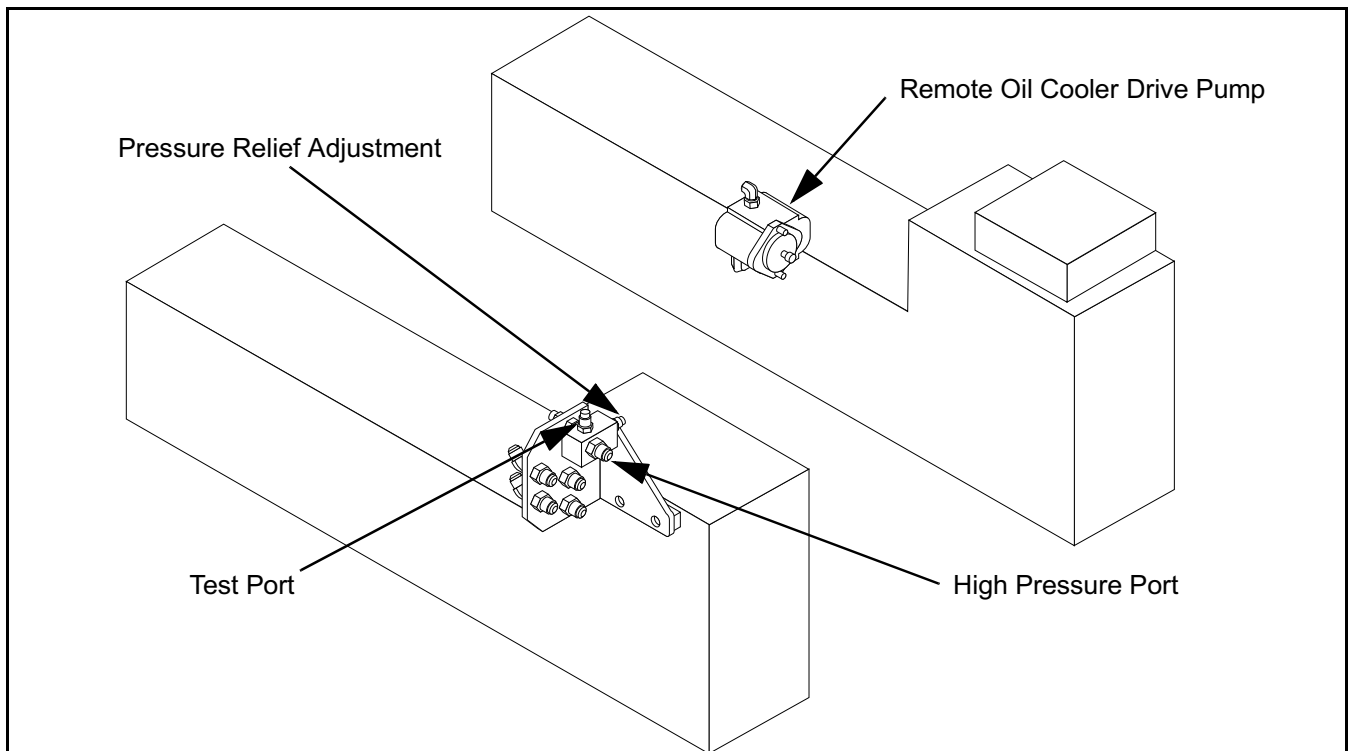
22 Remote Oil Cooler Drive Pressure Adjustment
